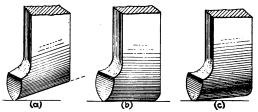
Front clearance on shaper tool, (a) too much; (b) not any, will rub; (c) correct, about 3 degrees.
